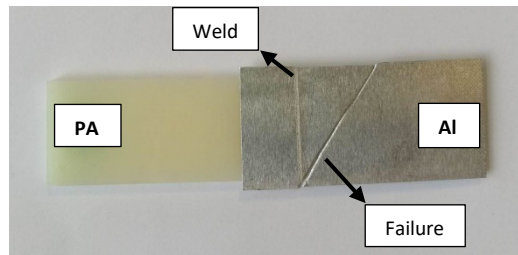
Failure of the base metal during the tensile-shear test in the optimum condition of welding of D category.
